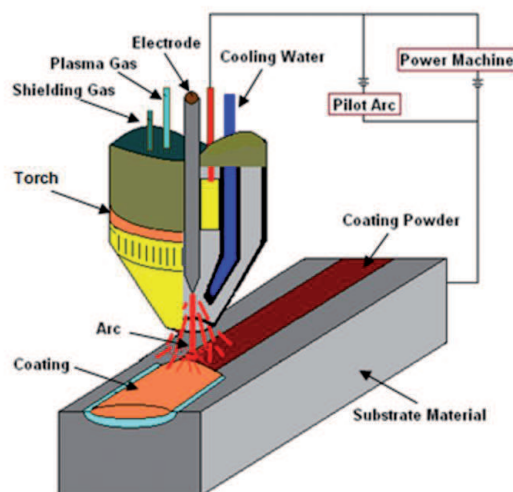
Schematic appearance of PTA weld-surfacing process
